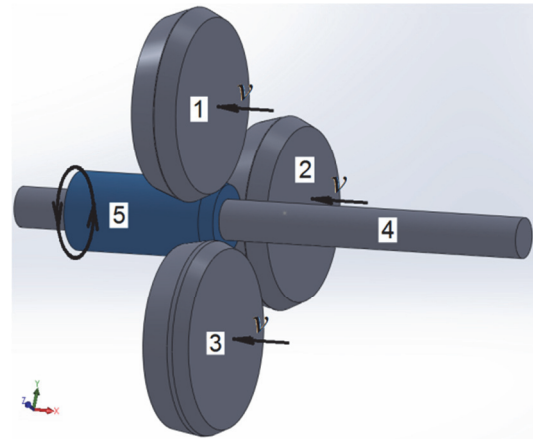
Scheme of the reverse flow forming process (1, 2, 3 - rollers, 4 - mandrel and 5 - tube) using three rollers machine.
